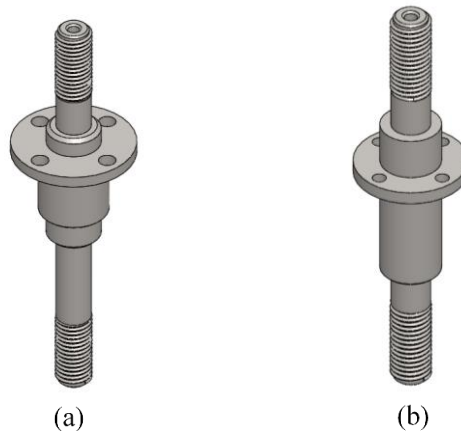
(a) Shaft-2, (b) shaft-3.
